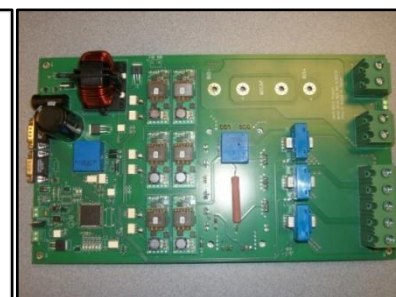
This photograph shows the completed motor drive board designed/constructed by former student Christopher C. Arnold.
